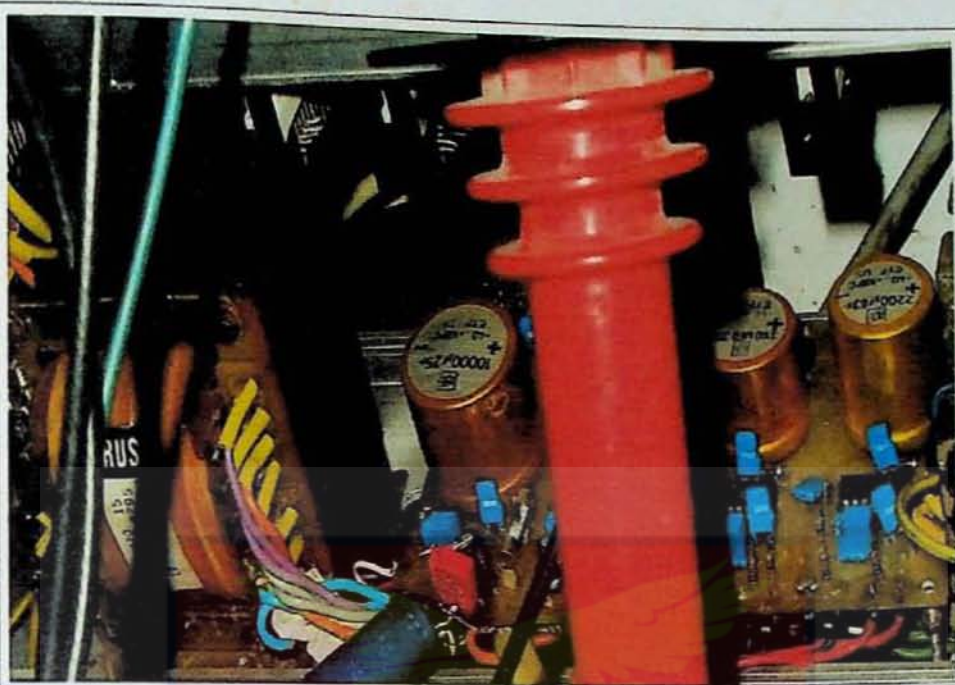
Completed low voltage DC power supply (+5V, +12V and -12V) built on a PCB.
